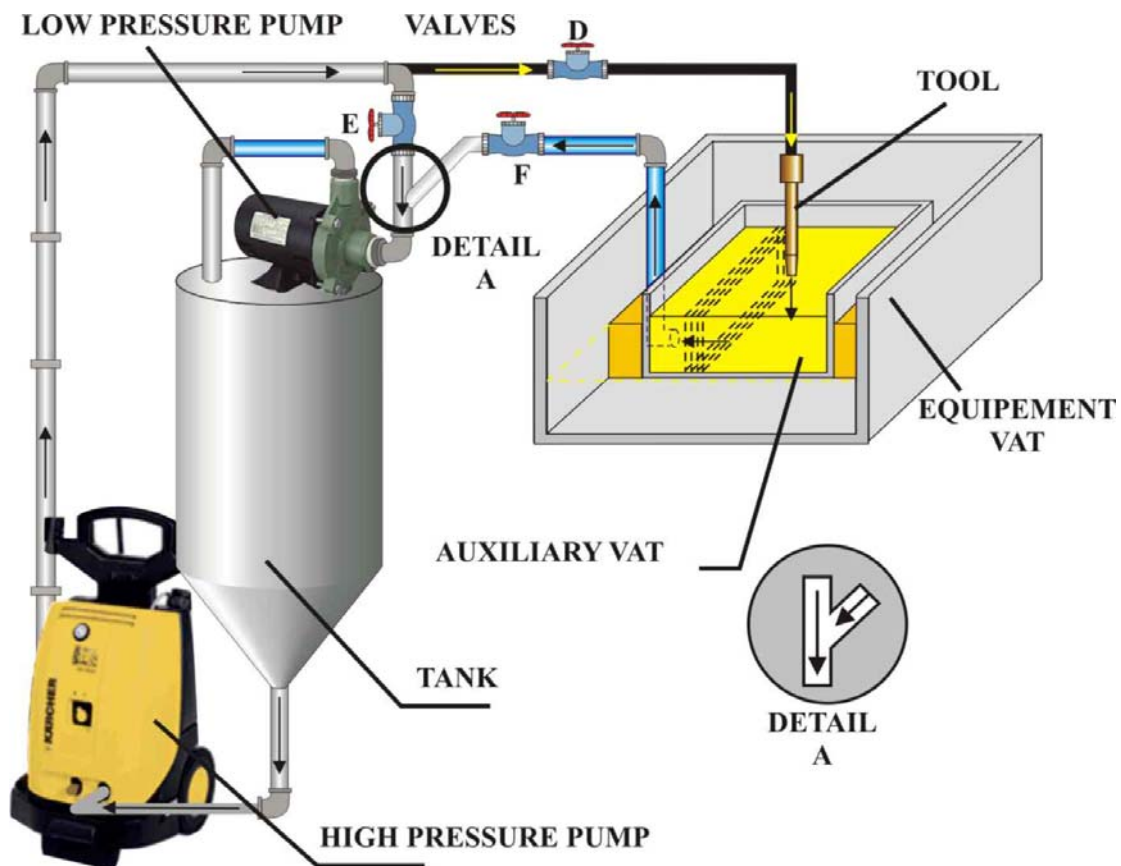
Assembly scheme of the Abrasive Water Jet in EDM machine (high pressure)'s experimental prototype.
